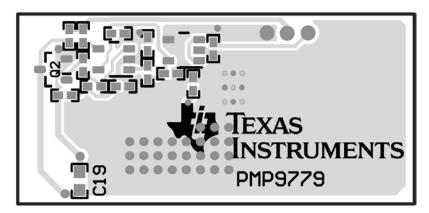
PMP9779 Bottom Layer and Bottom Silkscreen
